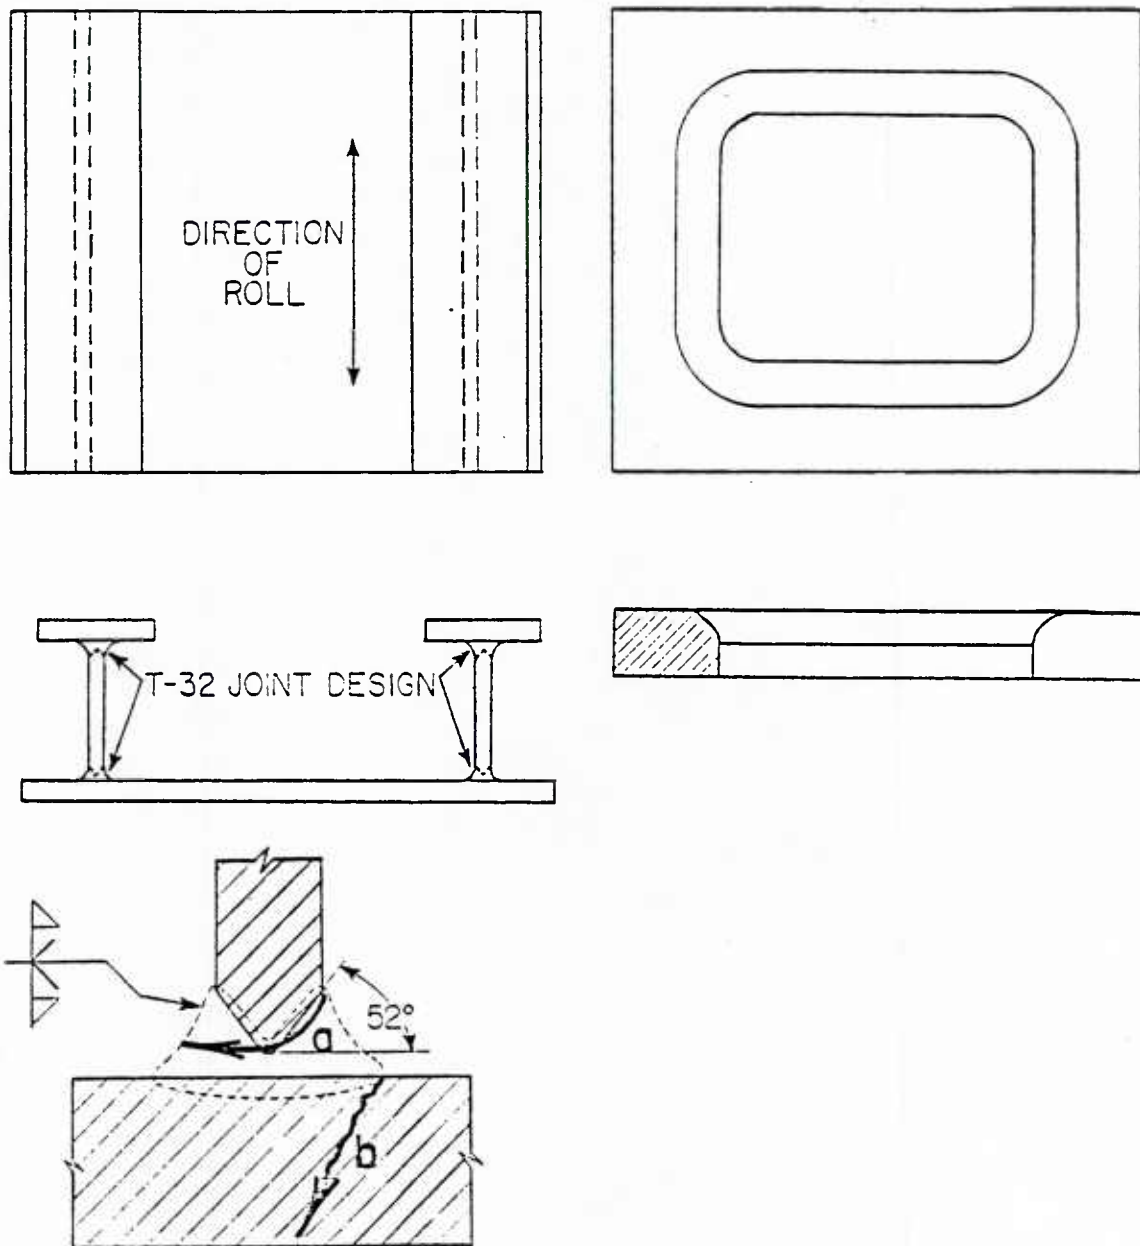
EXPLOSION TEST OF MODEL SIMULATING RESTRAINT OF EXTERNAL FRAMING: SPECIMENS AND WELD JOINT DESIGN (LEFT); CONFIGURATION OF EXPLOSION TEST DIE (RIGHT), AND OBSERVED FRACTURE PATHS ARE IDENTIFIED IN THE LOWER SECTION BY THE LETTER A AND B. THE EXPLOSIVE WAS DETONATED ON THE T-FRAME SIDE OF THE MODEL. AFTER BABECKI AND PUZAK(36)
